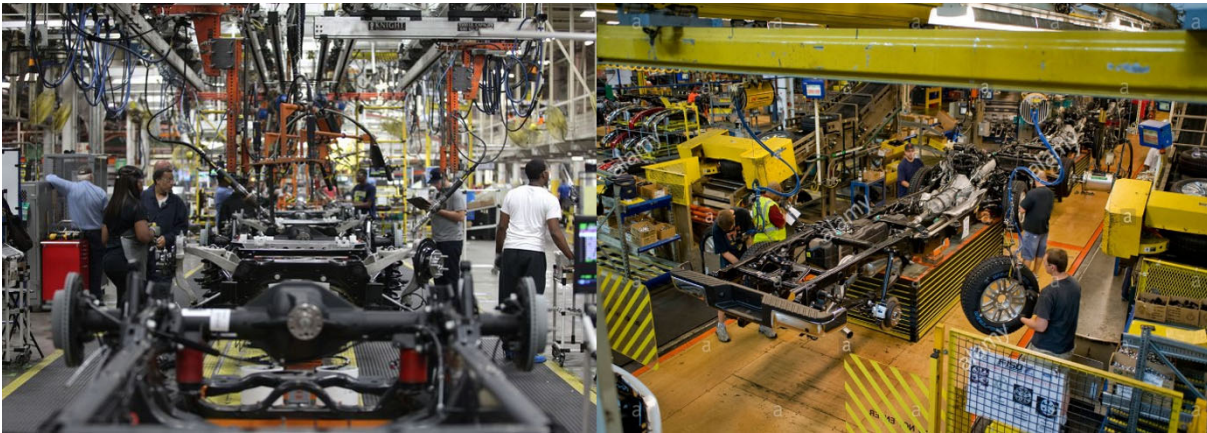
Chassis assembly, Ford Motors (Spencer, 2009)
